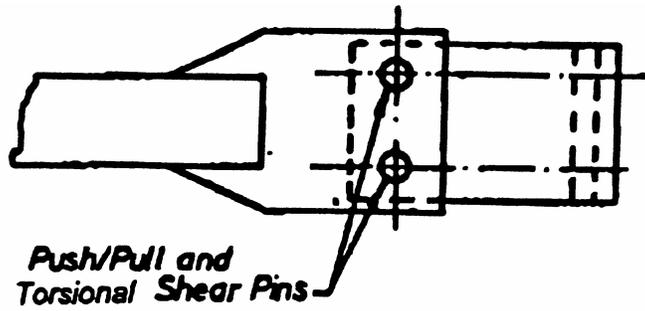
Typical Shear Pin, Bushings, and Head Retention Bolt Configuration
